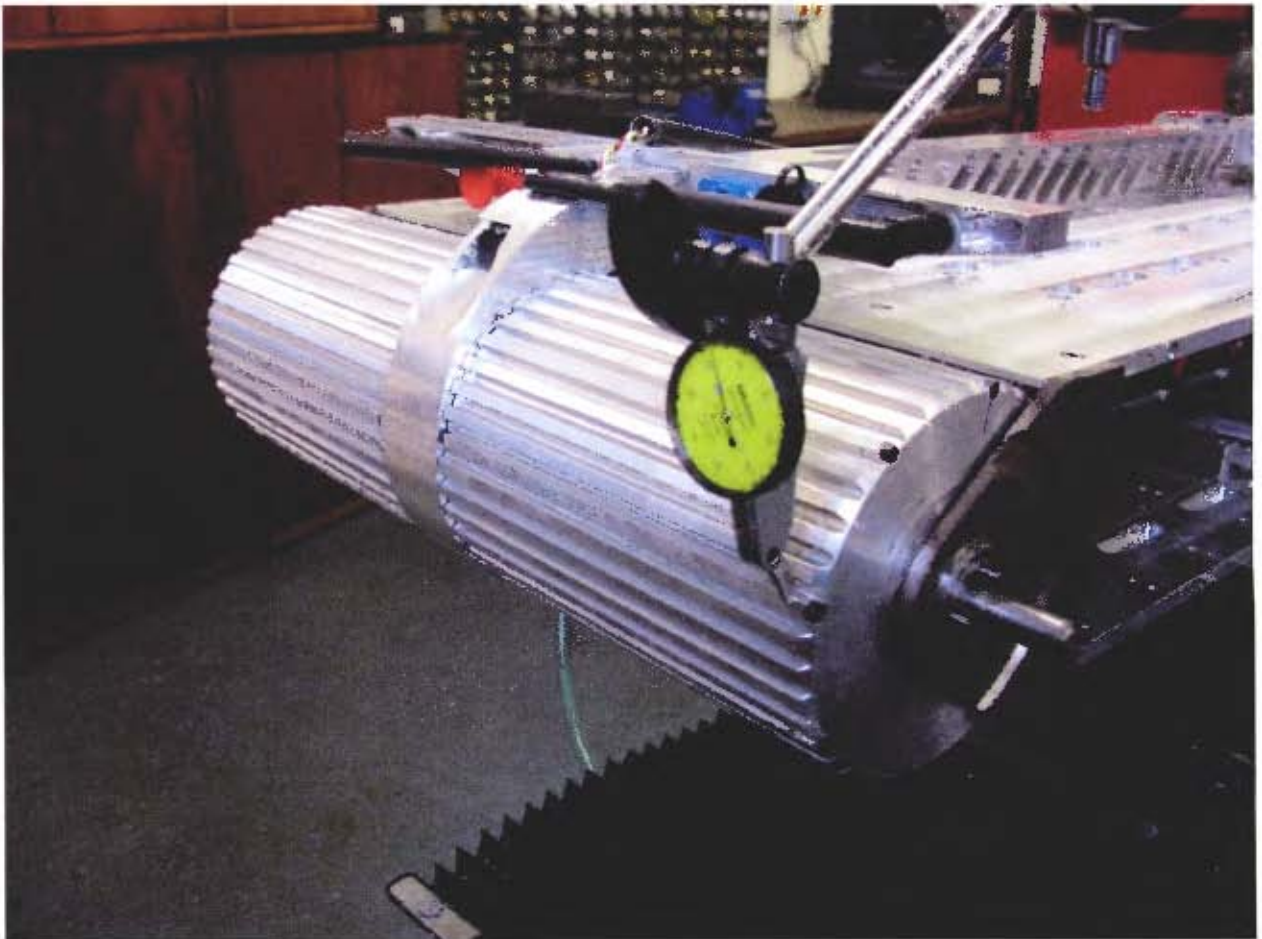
The platform secured on the table of a milling machine to determine the degree to which the drive pulleys were out of alignment.
